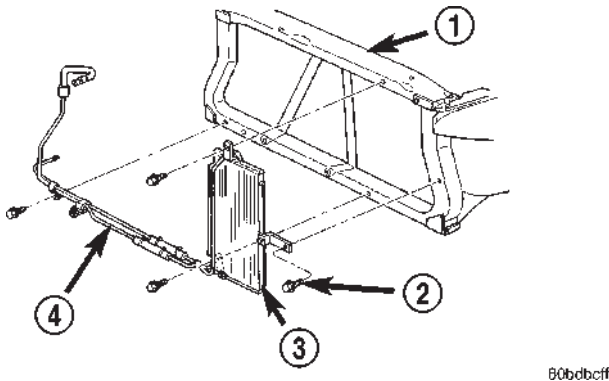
Automatic Transmission Oil Cooler—8.0L Engine
